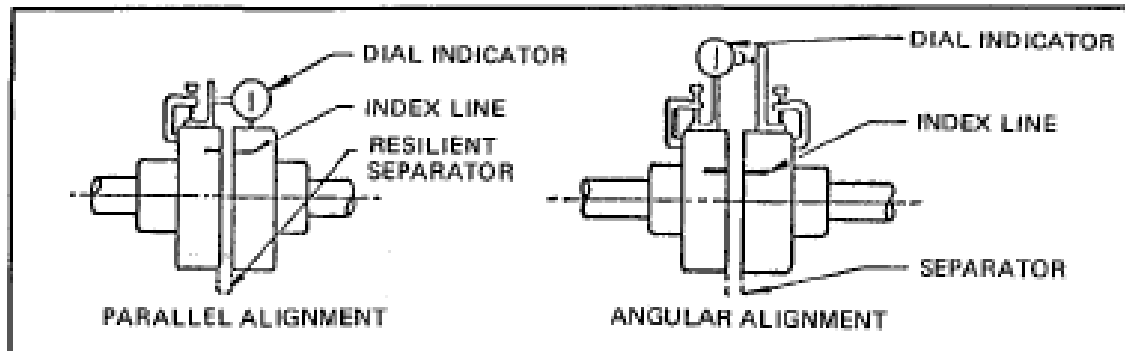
TESTING ALIGNMENT, DIAL INDICATOR
